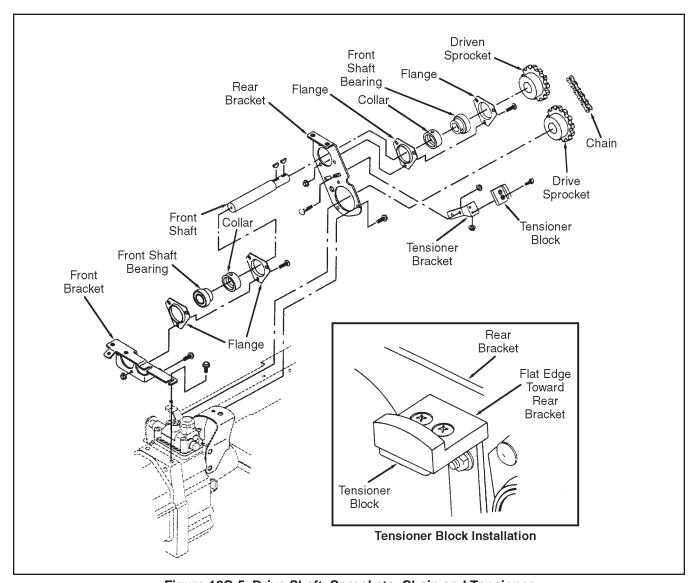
C-5. Drive Shaft, Sprockets, Chain and Tensioner
